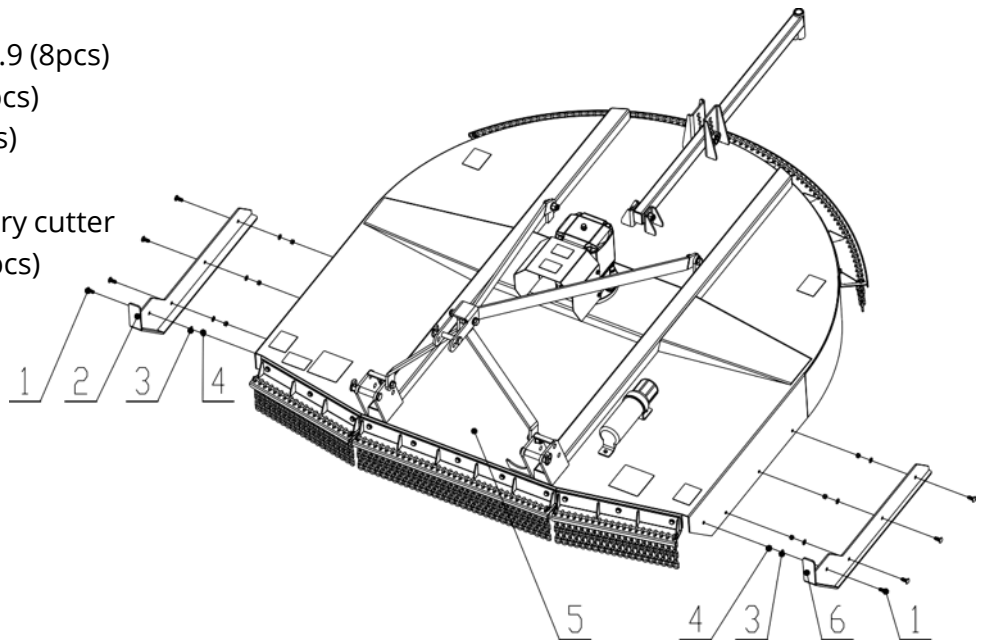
Installing R & L Skid Weldment And Fittings
